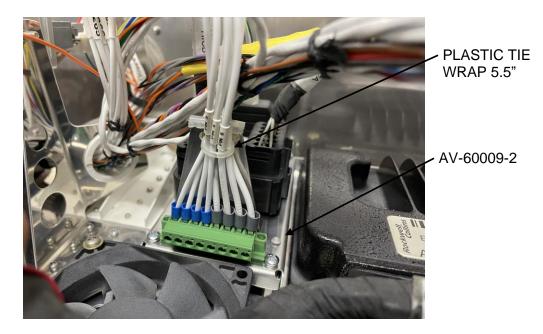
ATTACHING WIRES TO HIC MODULE
